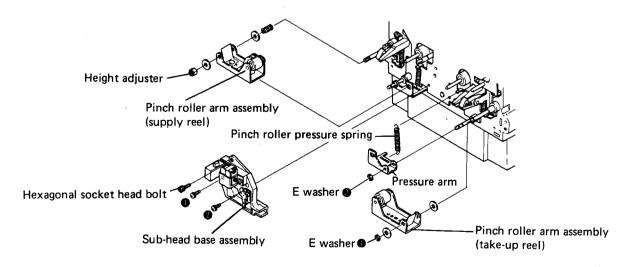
Removing the sub-head base ass'y, pinch roller arm ass'y and pressure arm
